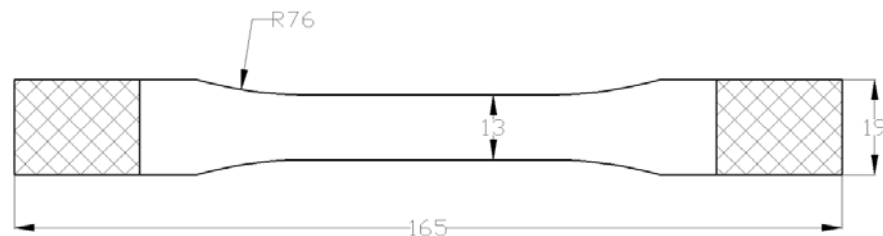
Schematic diagram of dog bone shape tensile specimen
